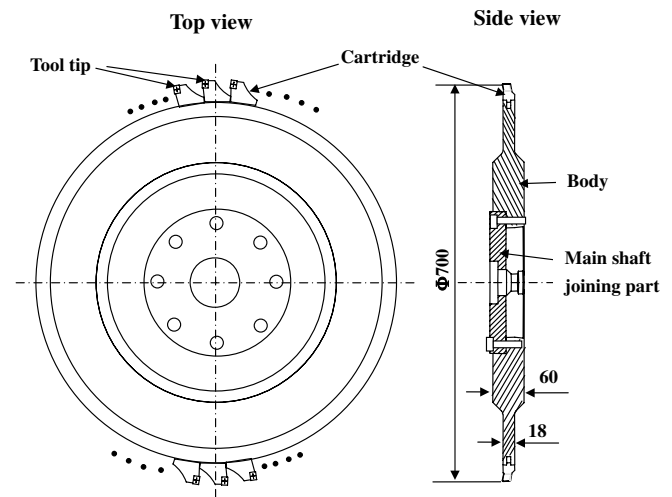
Schematic drawing of a conventional steel circular plate cutting tool.
